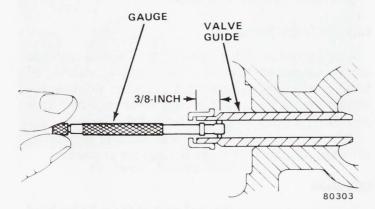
B-26 Measuring Valve Guide with Telescoping Gauge
